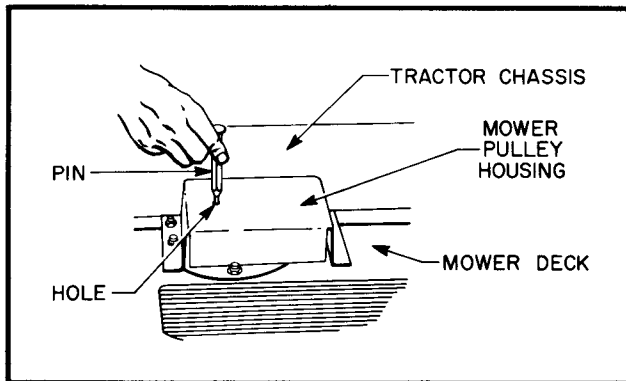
Locking Plate Pulley To Loosen Plate Nut
